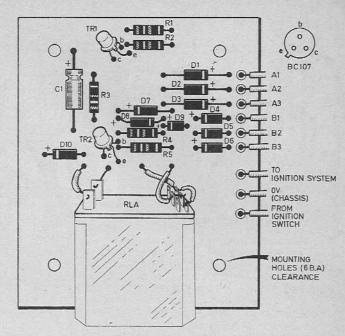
Printed circuit board required. In the prototype the relay is mounted on the board using an epoxy glue.
